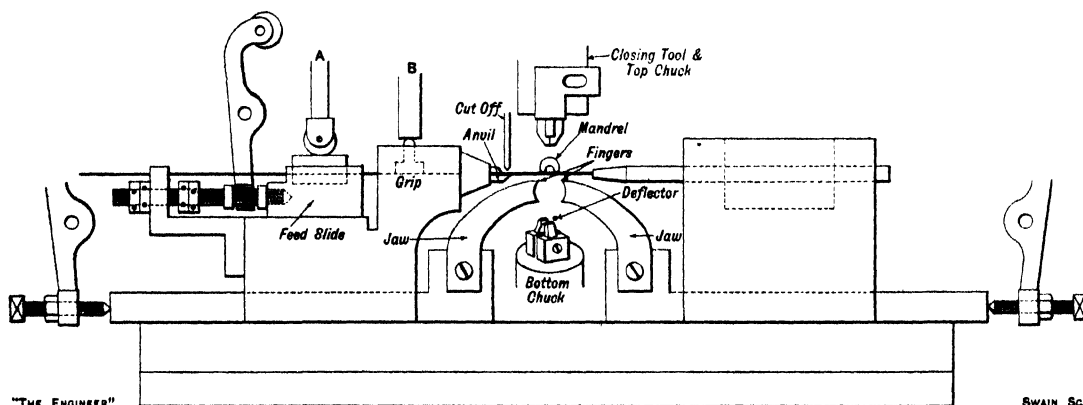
CURB CHAIN MAKING MACHINE MECHANISM.
